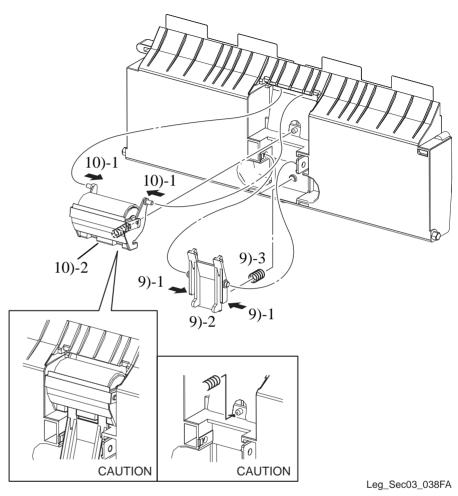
Removal of HOLDER ASSY RETARD 500
